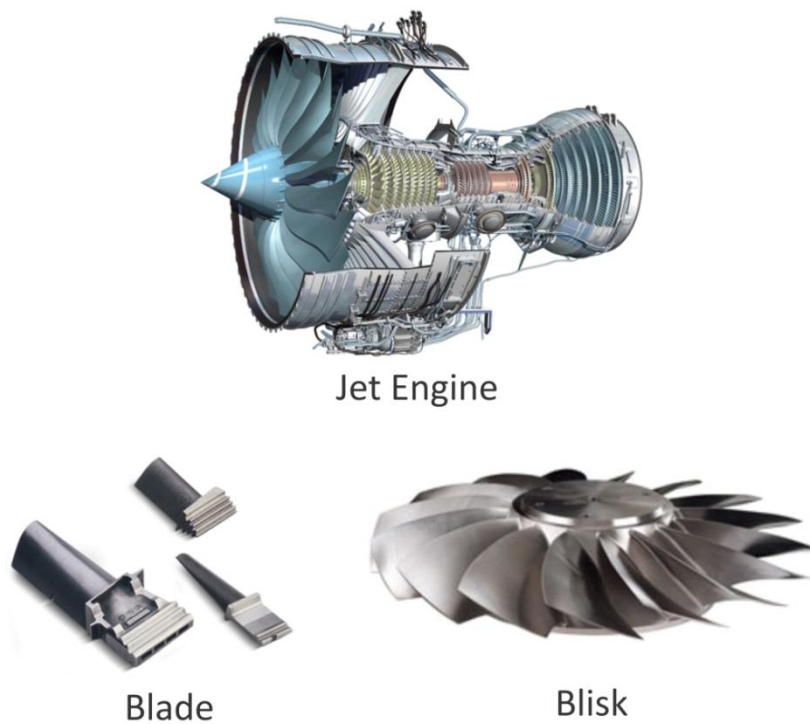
Jet engine [2], Blisk [3] and Blades [4]
